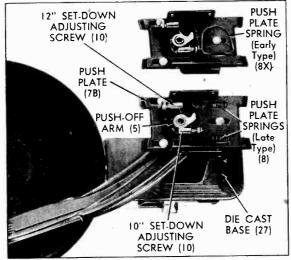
RECORD CHANGER, TOP VIEW SHOWING LOCATION OF PARTS
